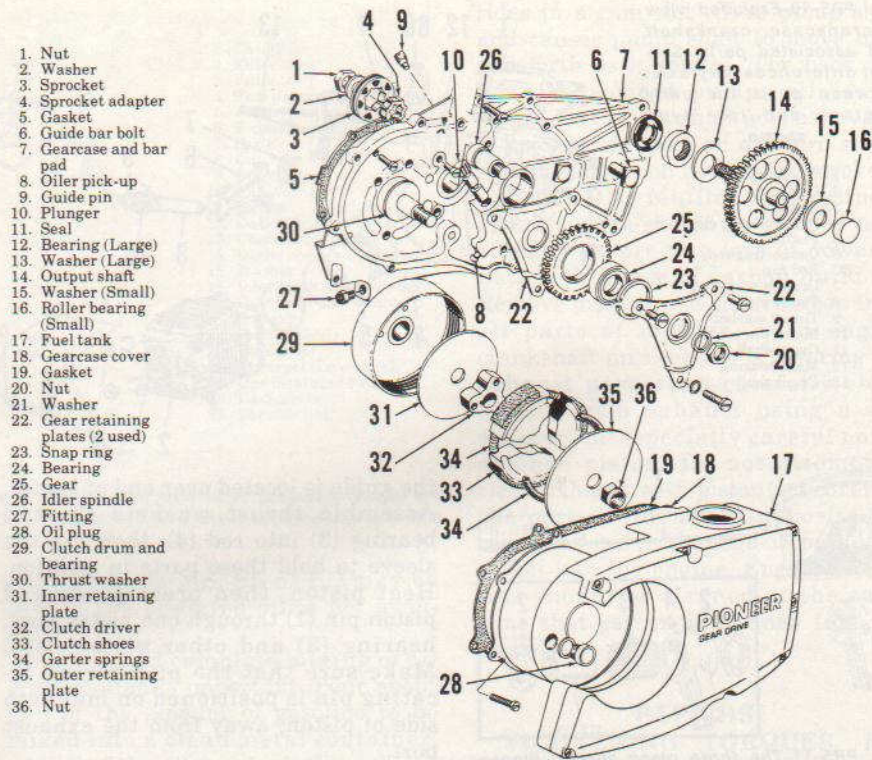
Exploded view of gearcase and clutch assembly typical of 1520 and 1560 models. Automatic chain oiler (parts 8, 9 & 10) is not used on all models.
